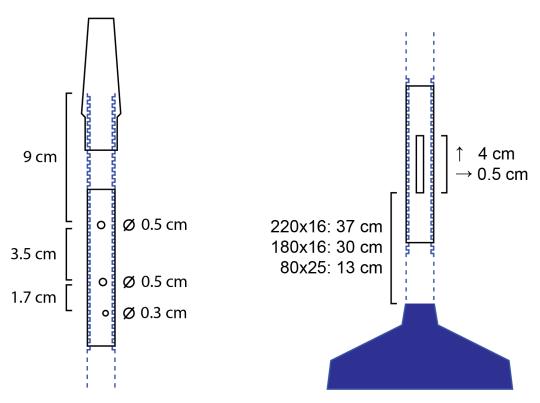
A scheme indicating the location of the finger holes on the instruments played in the video examples.
